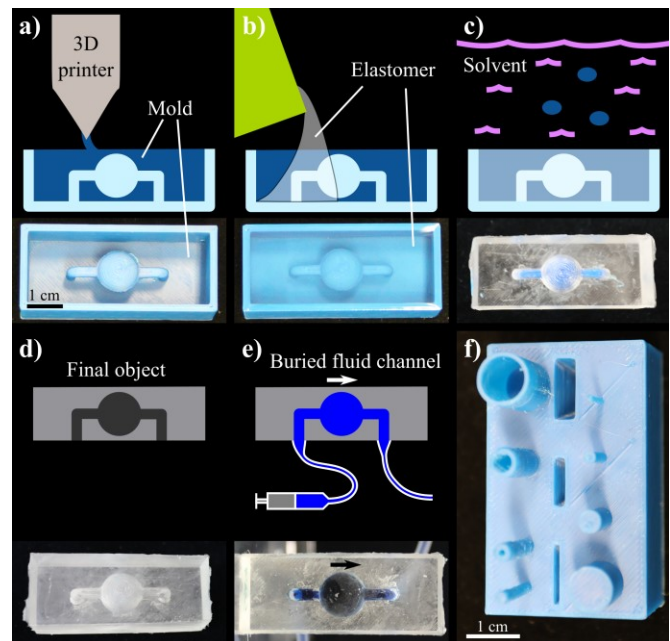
Fabrication process for sacrificial mold manufacturing. In fig. 1a, a sacrificial part is 3D printed, b) silicone elastomer is cast into the 3D printed mold, c) Sacrificial mold is dissolved in solvent, d) Final soft object with buried channel, e) Soft silicone device filled with dyed water and f) A photograph of a 3D printed test object. This object design was used in the dissolving experiments. a-e) have the same scale bar.
